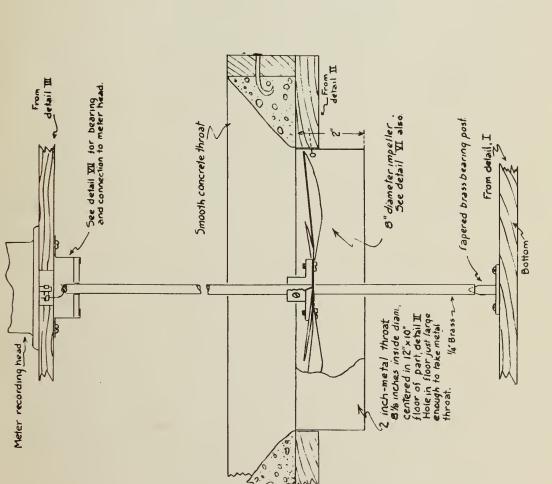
Detail of impeller assembly and 2-inch metal throat.
